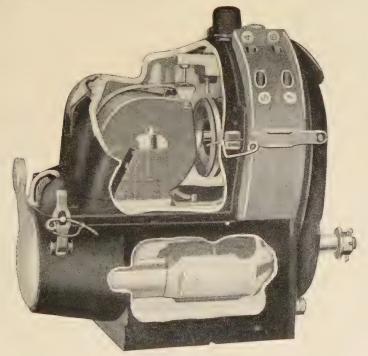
Cut-away view of the Scintilla aircraft magneto.
